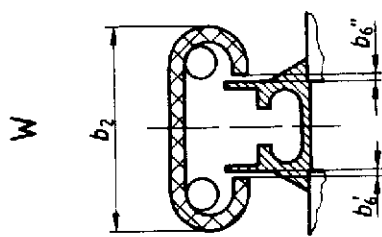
Escalator/passenger conveyor (sectional view), principal dimensions
